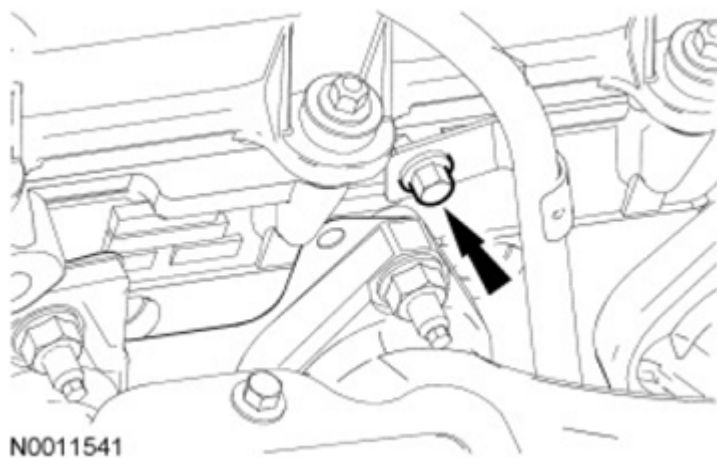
Locating Rear Oil Level Indicator Tube Bolt
